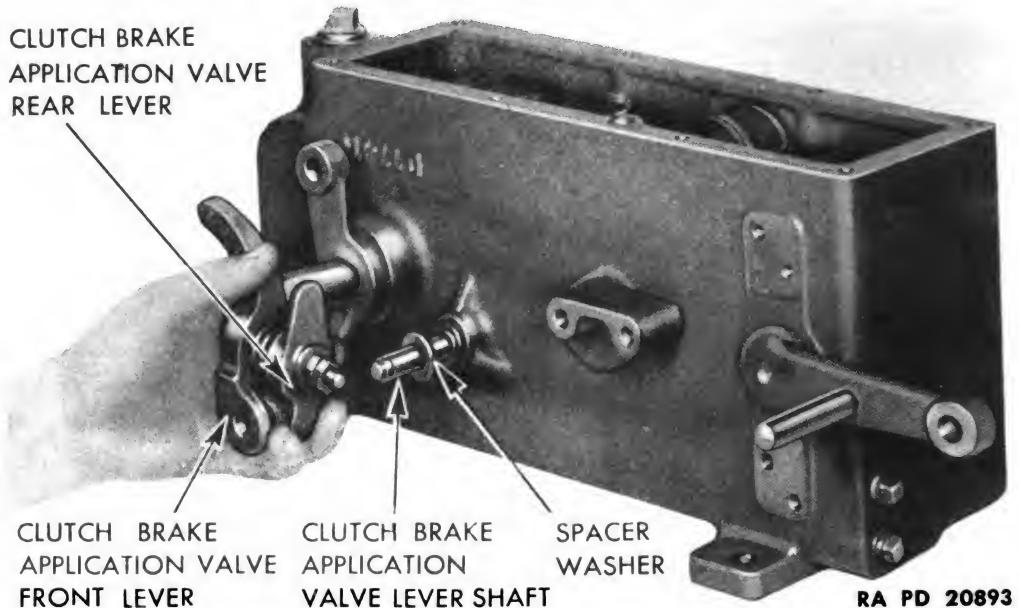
Removing Clutch Brake Application Valve Lever Assembly
